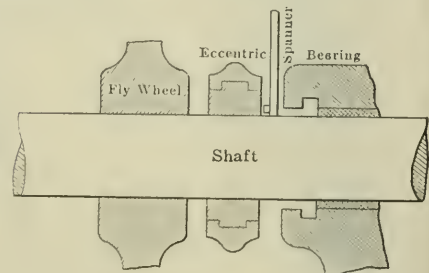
FACE SPANNER TURNING ECCENTRIC ON SHAFT
